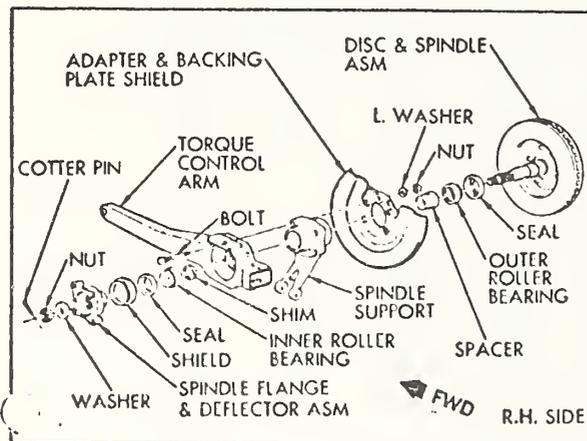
EXPLODED AND CROSS-SECTIONAL VIEW OF REAR SPINDLE
